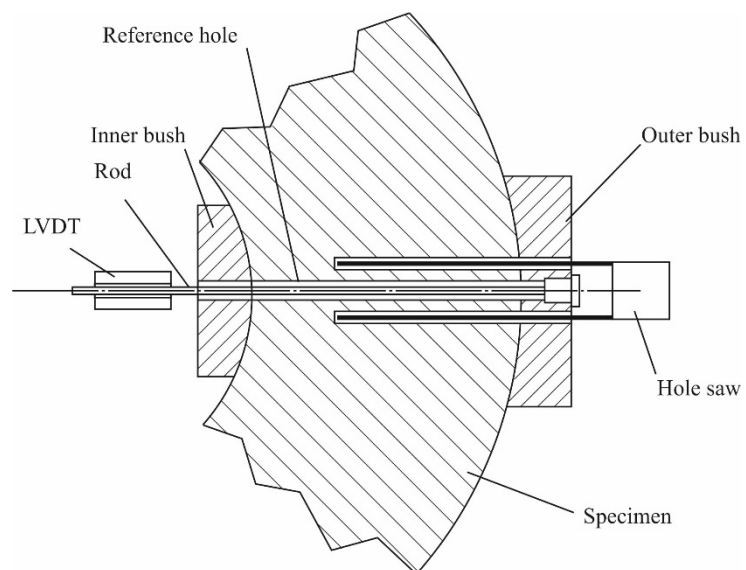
Diagram showing the method used to measure through-thickness assembly stress.
